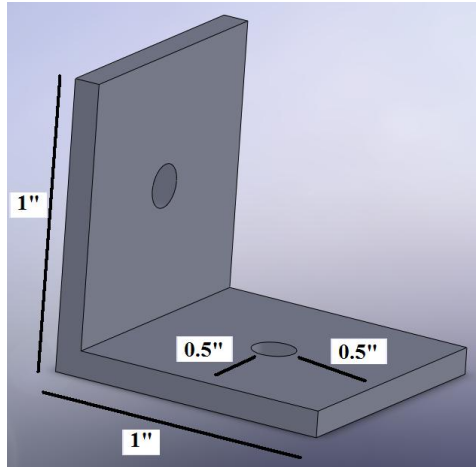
Brackets used to assemble Ramp and Motor Ramp
